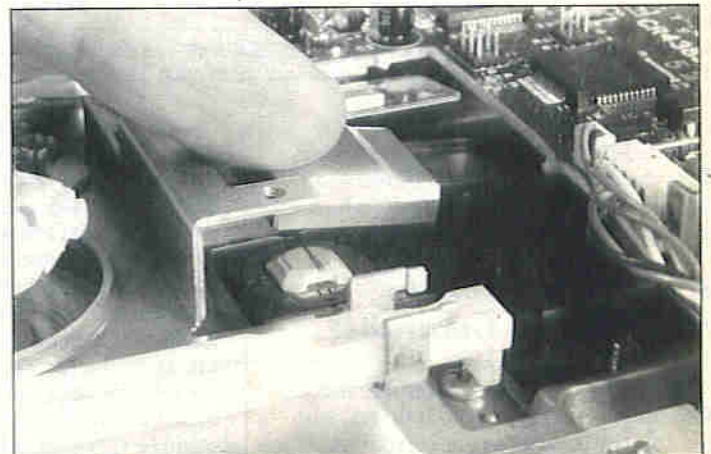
Close-up of the double-sided head assembly for the 5 1/4 in. drive lower head surface is clearly seen. The detail of the unit.
